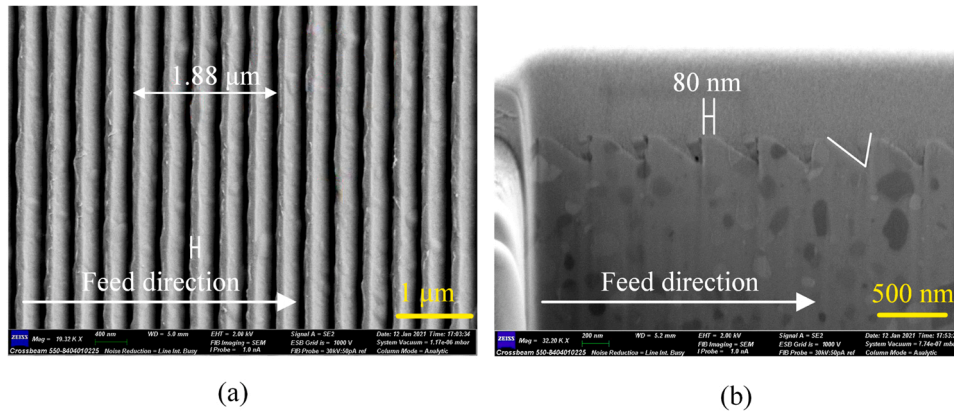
Morphology of the machined grooves with a period of 380 nm. (a) top view of SEM image, (b) cross-sectional profile.
